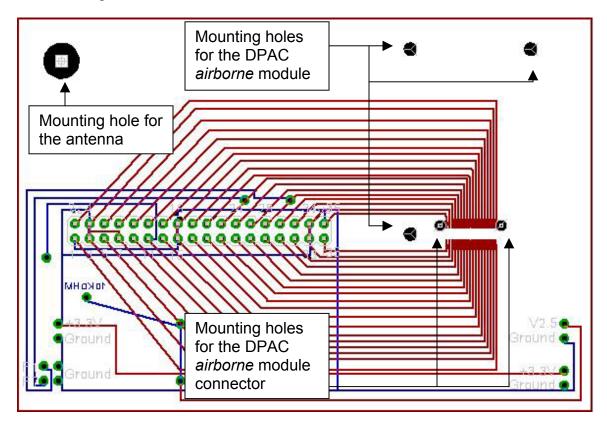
The Optimized DPAC Airborne Module Board Layout.
